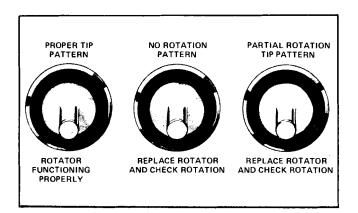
Valve Stem Wear Patterns - 307 Engine
